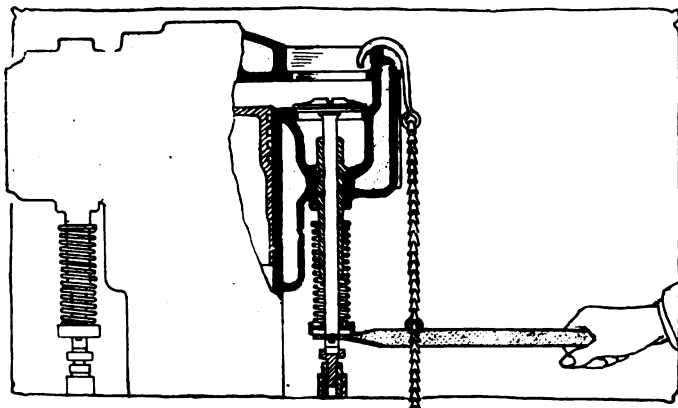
Pierce motor, showing method of lifting valve spring to remove key holding spring seat
